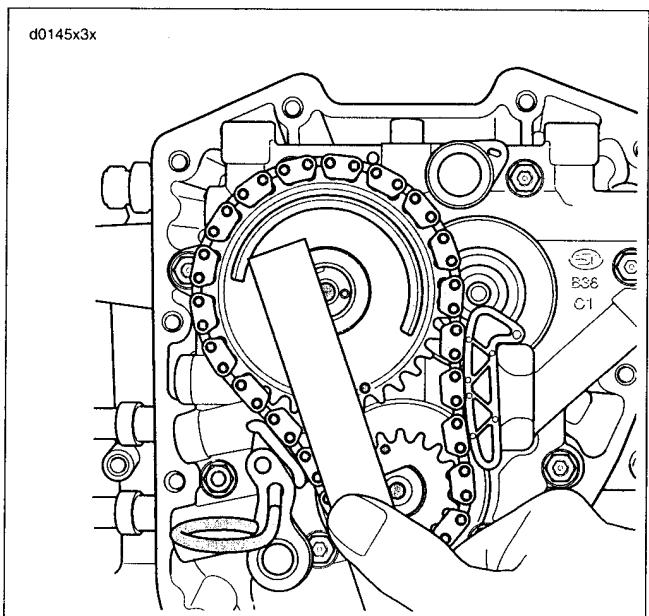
Verify Alignment of Crank and Rear Cam Sprocket Punch Marks
